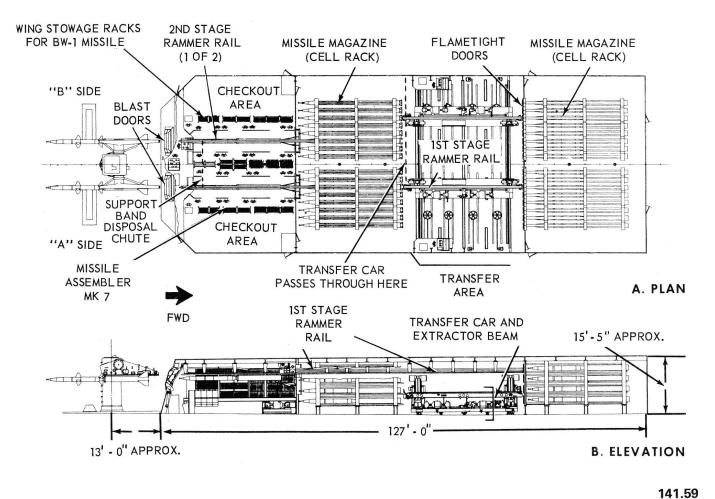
Guided Missile Launching System Mk 9: A. Plan; B. Elevation.
